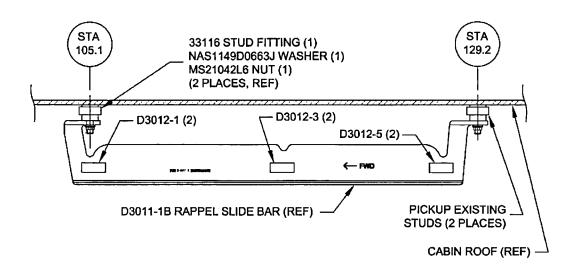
Installation of D205-523-043B Slide Bar Assembly (View Looking Inboard)
